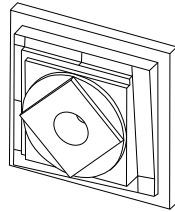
NAS 979 workpiece for error identification in five-axis machine tool [52]
